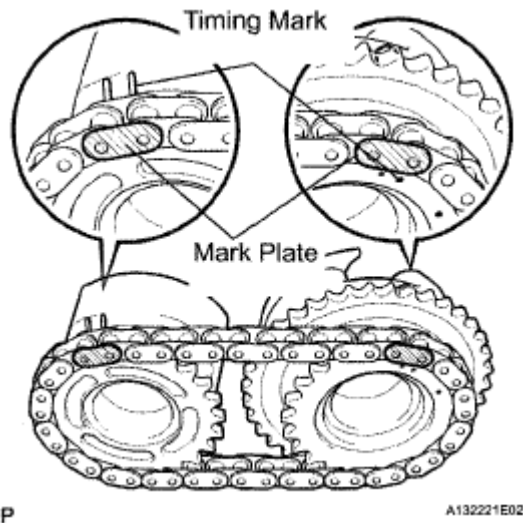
Aligning Mark Plate With Timing Marks Of Camshaft Timing Gears
